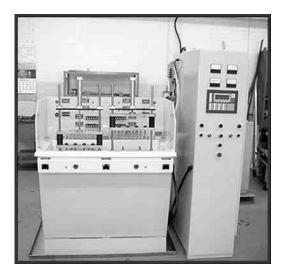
BENCH (OPEN) MACHINE CONFIGURATION
